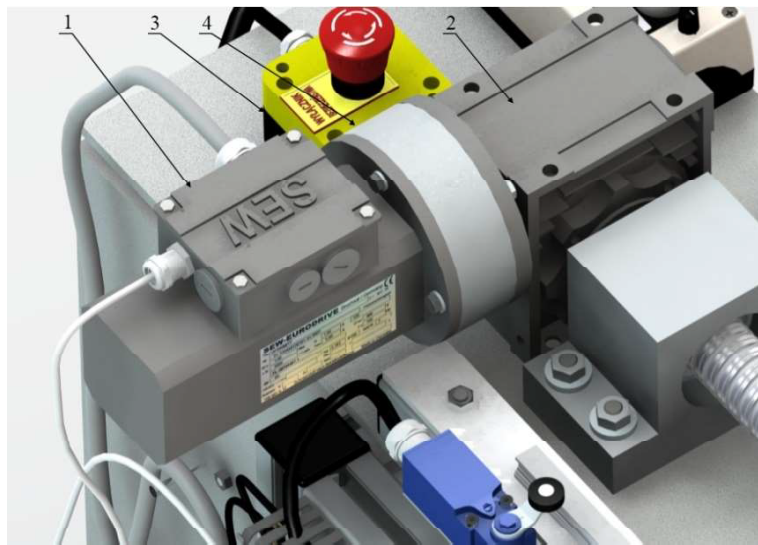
View of complete drive system, where: 1 - electric servomotor, 2 - worm gear, 3 - safety switch, 4 - mounting adapter
